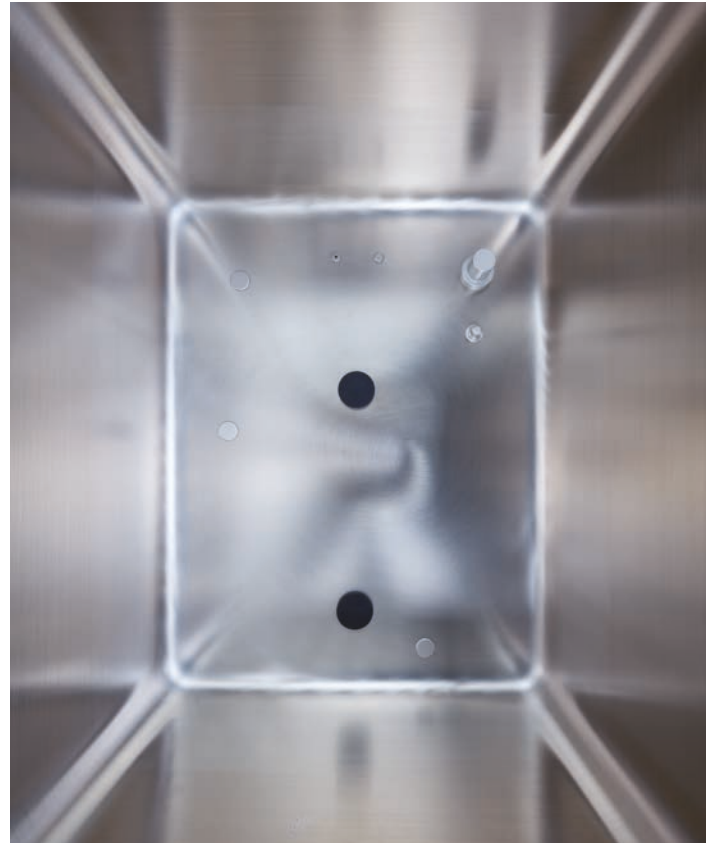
Fanless, deep-drawn stainless steel chamber with no weld seams
